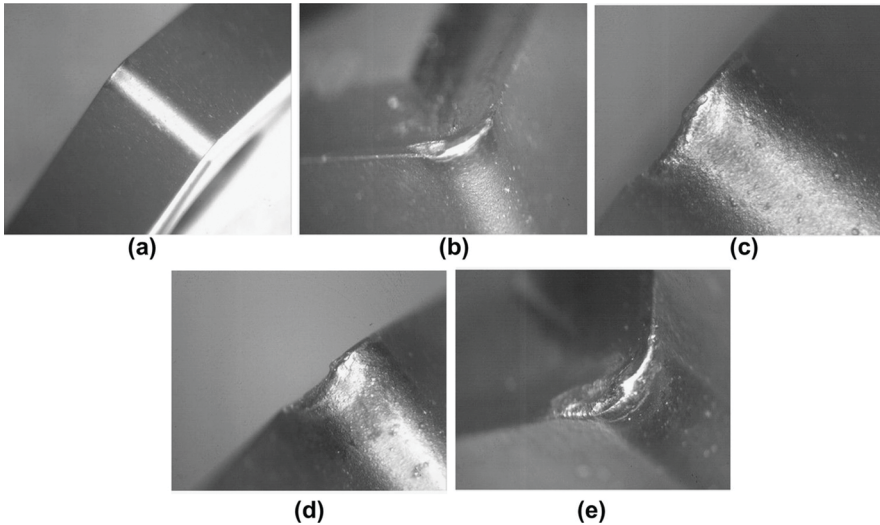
Tool tips of ZrCN coated carbide insert after machining times (a) 0.9 min, (b) 1.77 min, (c) 3.44 min, (d) 5.65 min and (e) 8 min. (From Ref. [14].)
